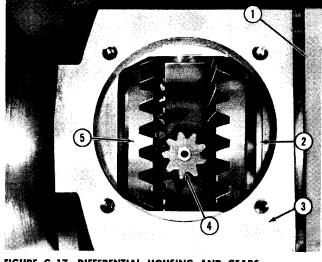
DIFFERENTIAL HOUSING AND GEARS
